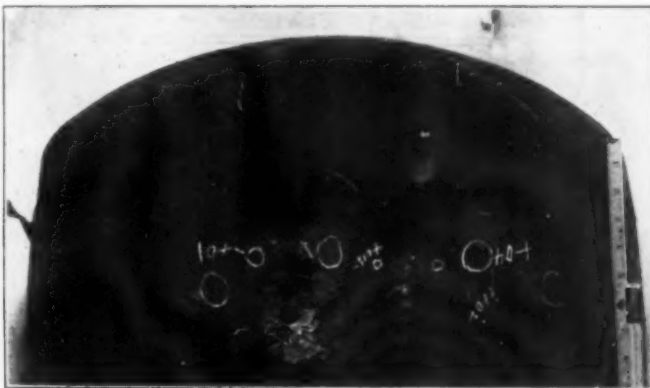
HEAD OF TANK NO. 5 BULGED AFTER TEST. ORIGINAL RADIUS 35 IN., FINAL RADIUS 19 IN.
